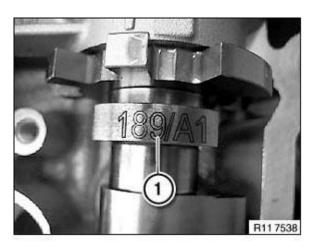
Identifying Letters/Numbers (A1) On Camshafts Courtesy of BMW OF NORTH AMERICA, INC.
